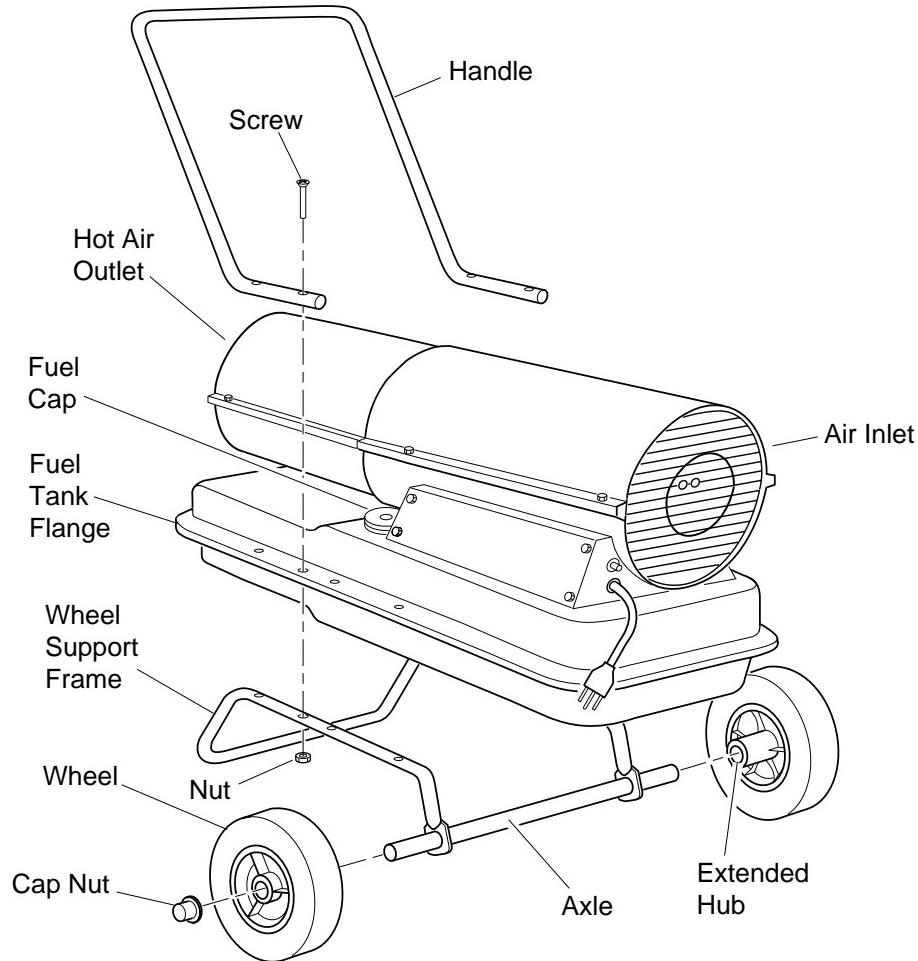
Wheel and Handle Assembly, 100/150 Models Only
